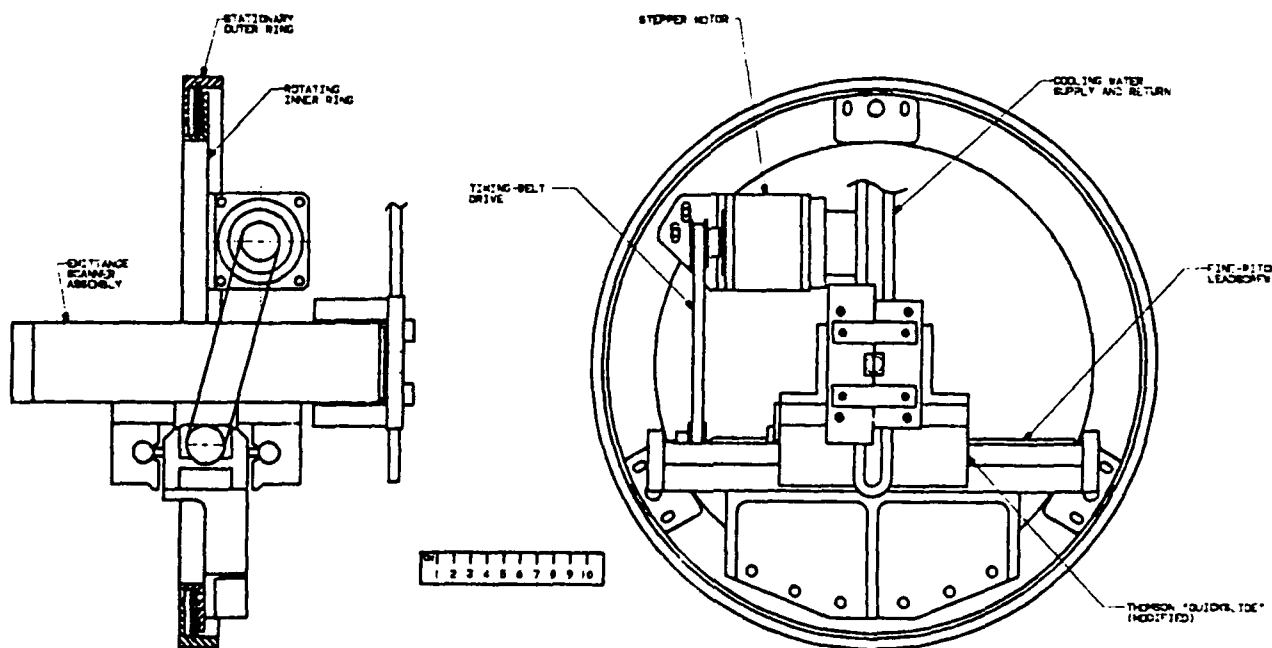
Front and side views of the ring assembly for the high-energy emittance scanner.
